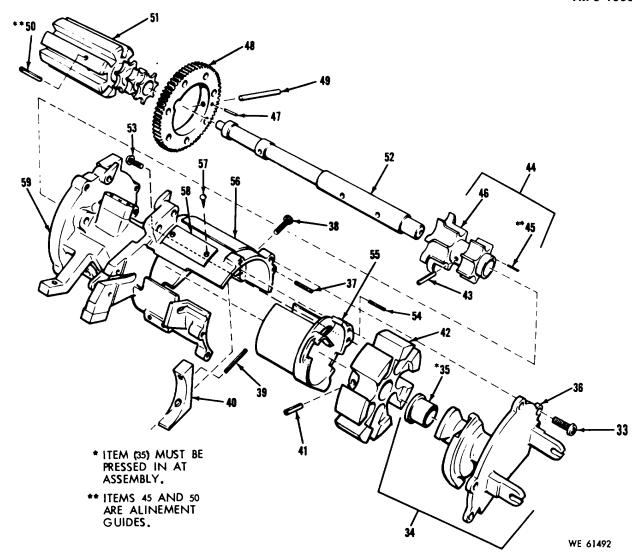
Delinking feeder MA U-56/A—exploded view (sheet 2 of 3).
